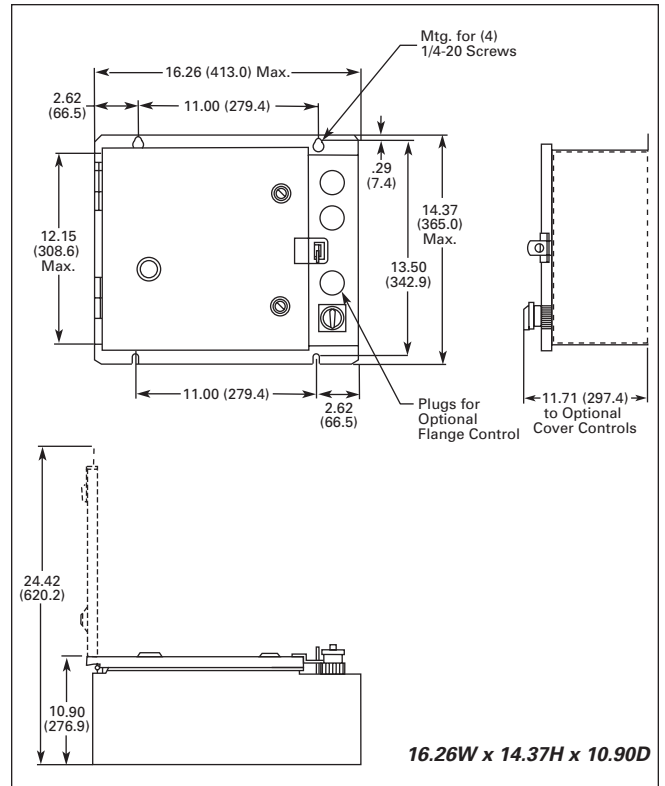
Box 7A, Type 12 — Approximate Dimensions in Inches (mm)
